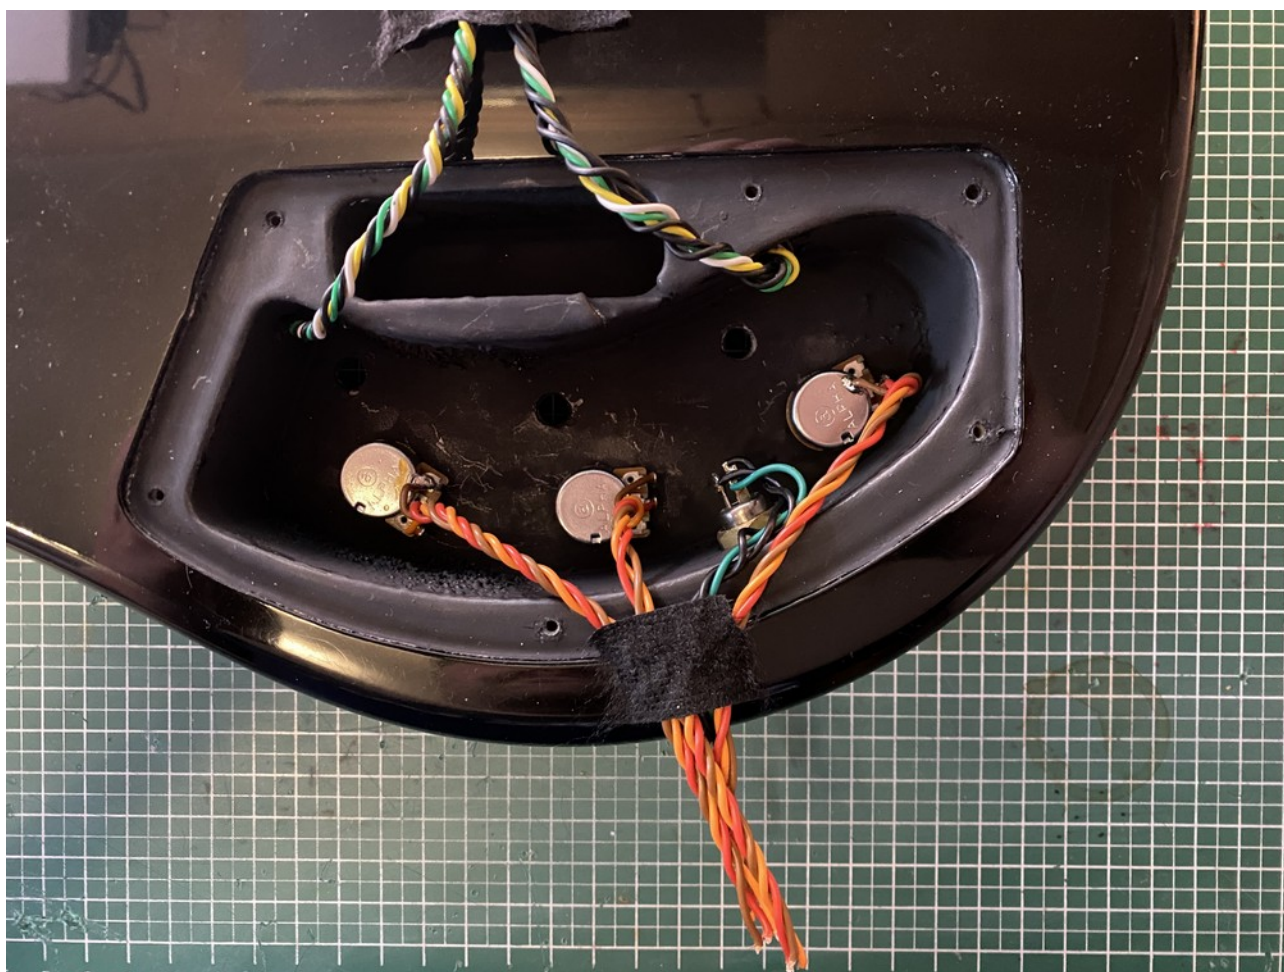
Mount Volume, HiCut and BassCut pot to body. Fix nut tightly.
